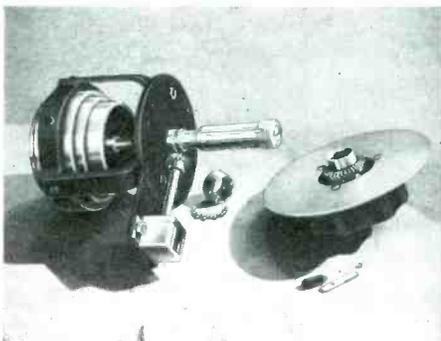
The micrometer capacitor, showing the rotor, stator, pad and support rings.
